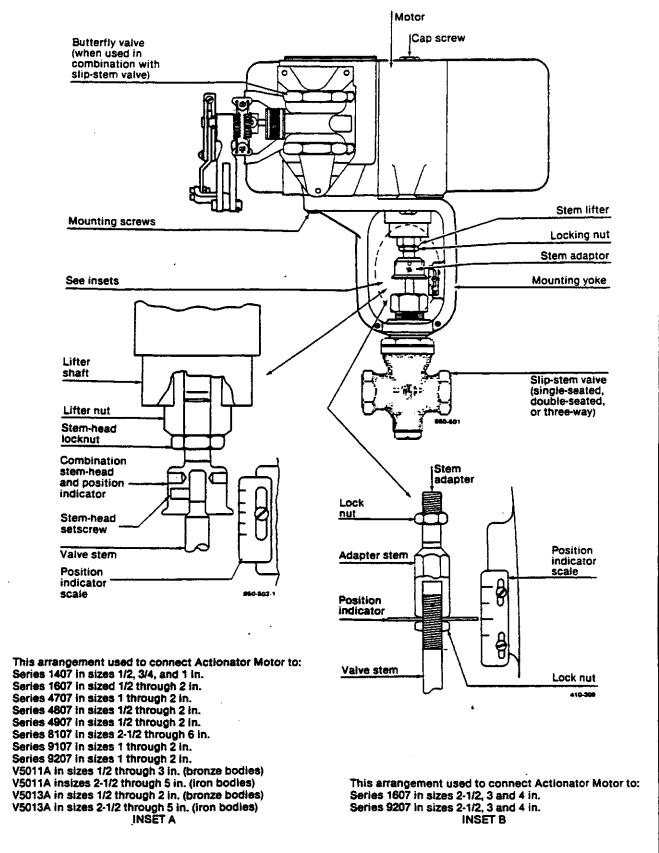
Illustration of M640B, 740B, and 940B Actionator Motor mounted to Yoke and Valve body with inserts showing variations in adaptors for different valves, A V51 Butterfly Valve is also shown mounted to the motor.
